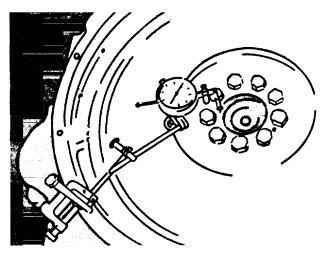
N-49. Check the Flywheel Bearing Bore with Indicator
